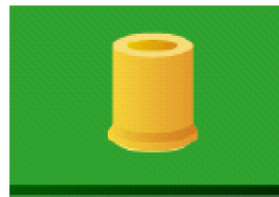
Plated PCB hole size to accommodate the solder mounting pillars : $2.9\text{mm} \pm 0.02\text{mm}$
